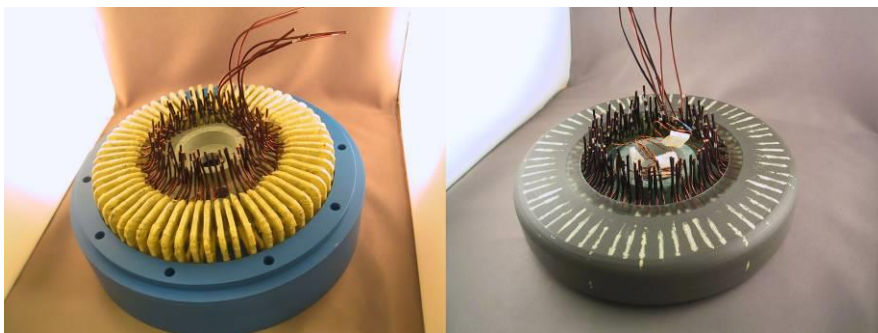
Left: A three-phase stator winding made of 60 single solenoid coils. Each coil is simple to make, but a complex geometry can be created by using many coils together. Right: The stator after radial rotocast moulding.
